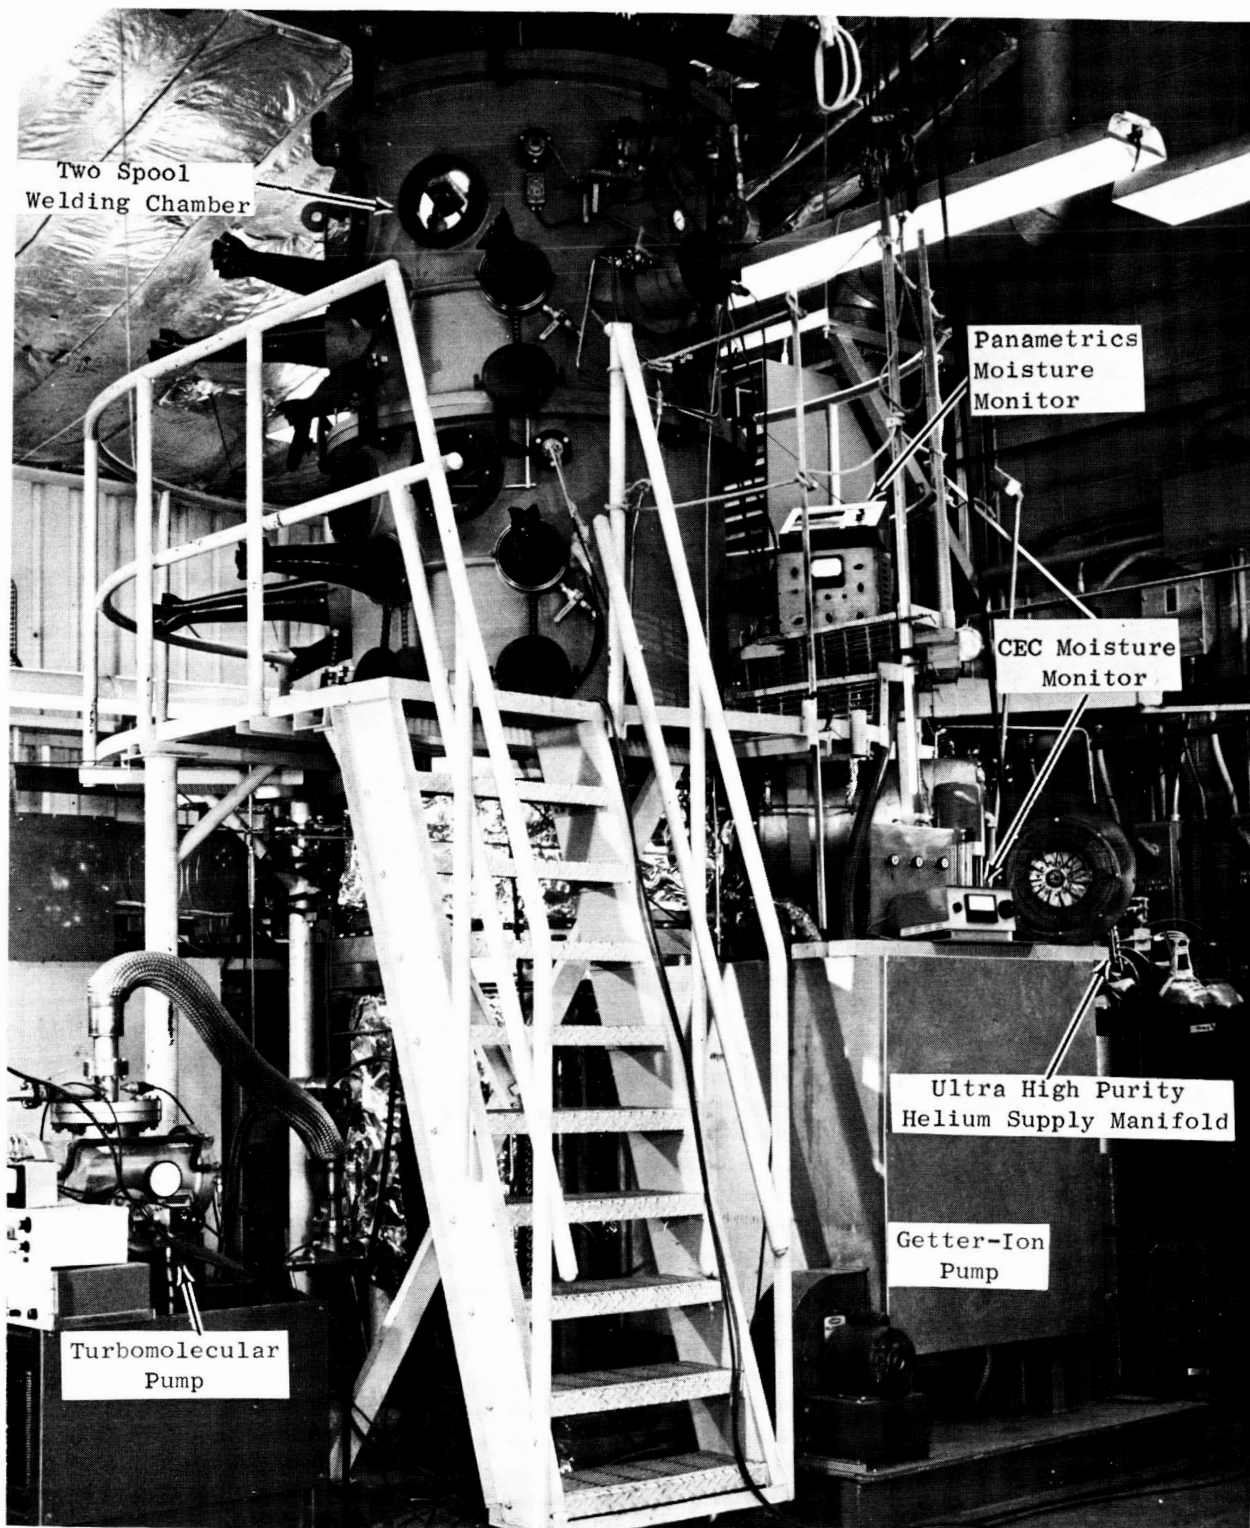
Welding chamber and ancillary instrumentation installed on T-111 Rankine system corrosion test loop facility.
